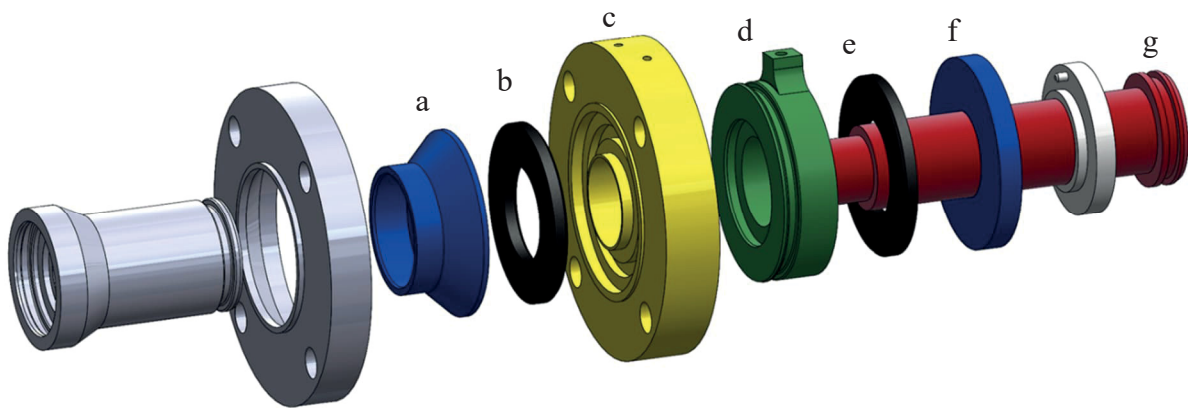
Exploded view of the aerostatic pump seal assembly. a) Pump chamber seal surface. b) Pump chamber side seal restrictor. c) Pump chamber side seal body. d) Ambient seal body. e) Ambient seal restrictor. f) Ambient seal surface. g) Pump shaft.
